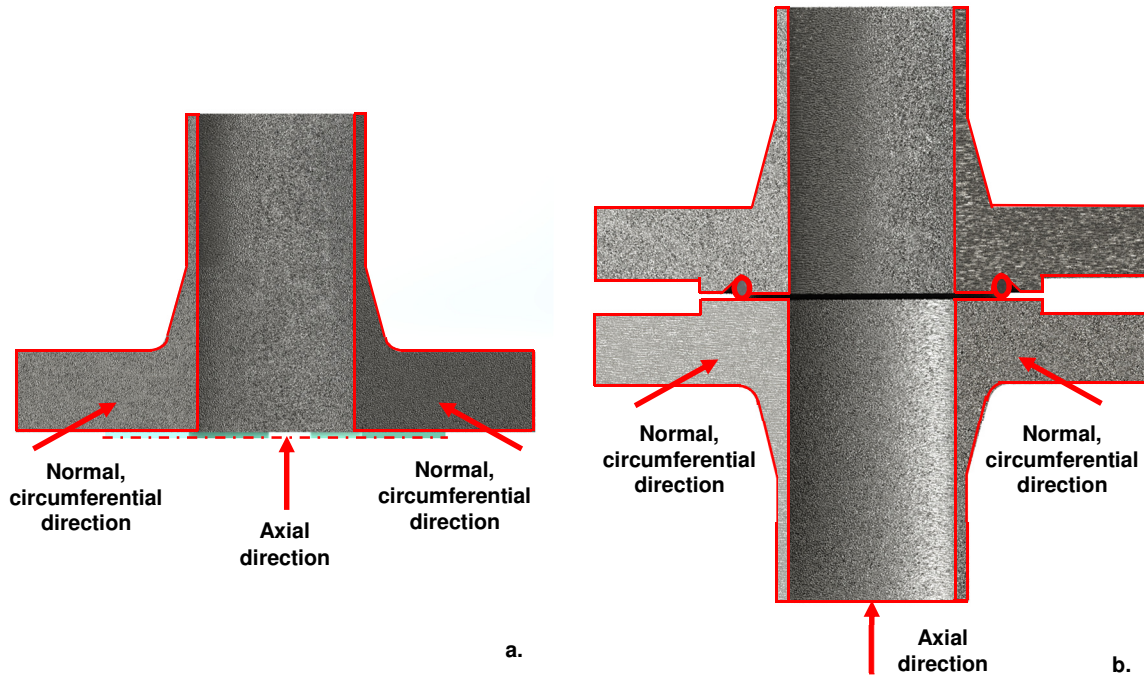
Application of the boundary conditions to the non-linear finite element models of (a) the flat and raised face flanges, and (b) the raised face flange with an O-ring groove
